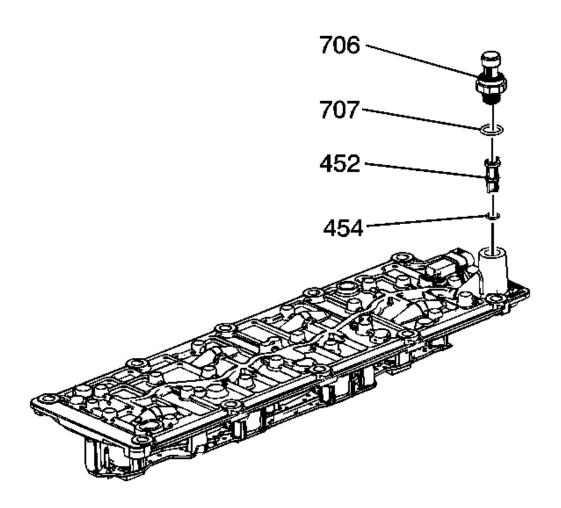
View Of Oil Pressure Sensor, Washer And Valve Lifter Oil Filter Courtesy of GENERAL MOTORS CORP.
